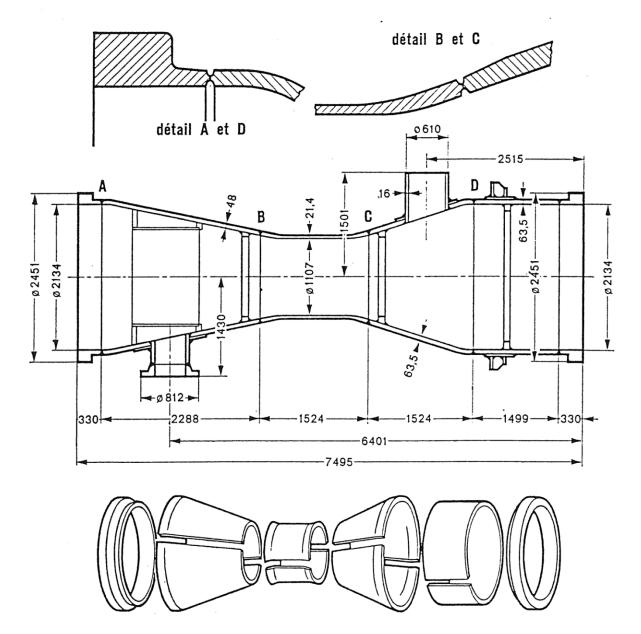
B-2: main dimensions of the pressure vessel and an exploded view of its constructive elements
